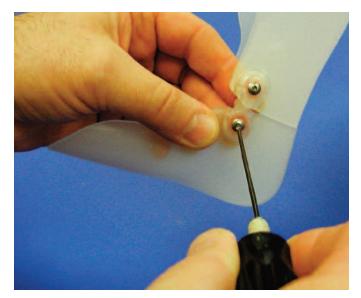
Large handled hex drivers are available to assist assembly (shown here).
